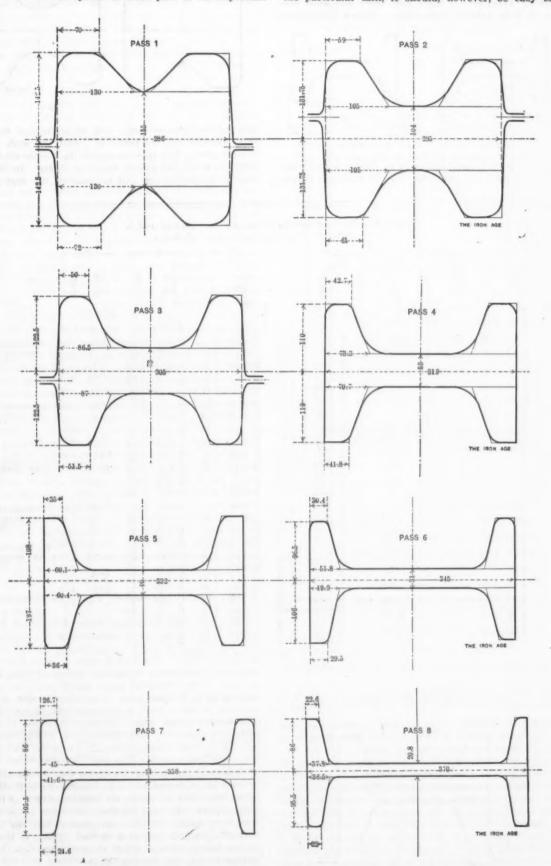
Roll Design for a German Standard Beam, No. 40. Forst S Passes. Dimensions in Millimeters.
